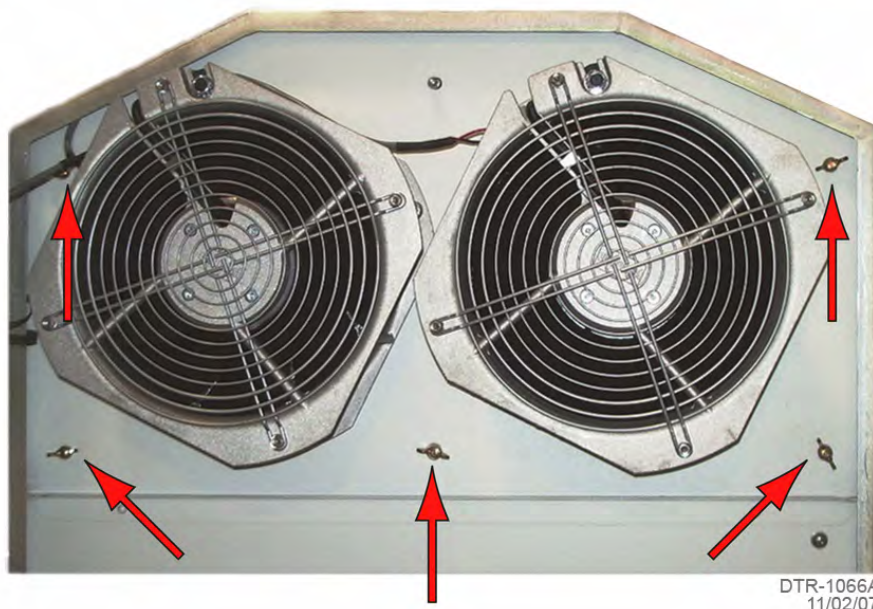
Filter Assembly Retaining Screws (Inside of Rear Door)
